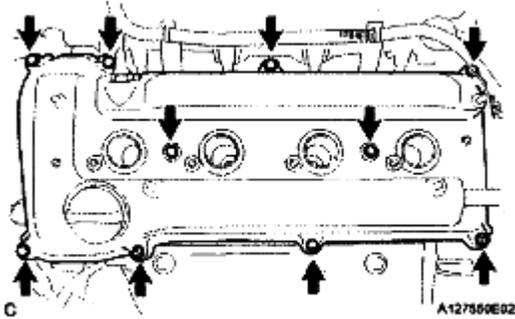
Locating Cylinder Head Cover Bolts And Nut
